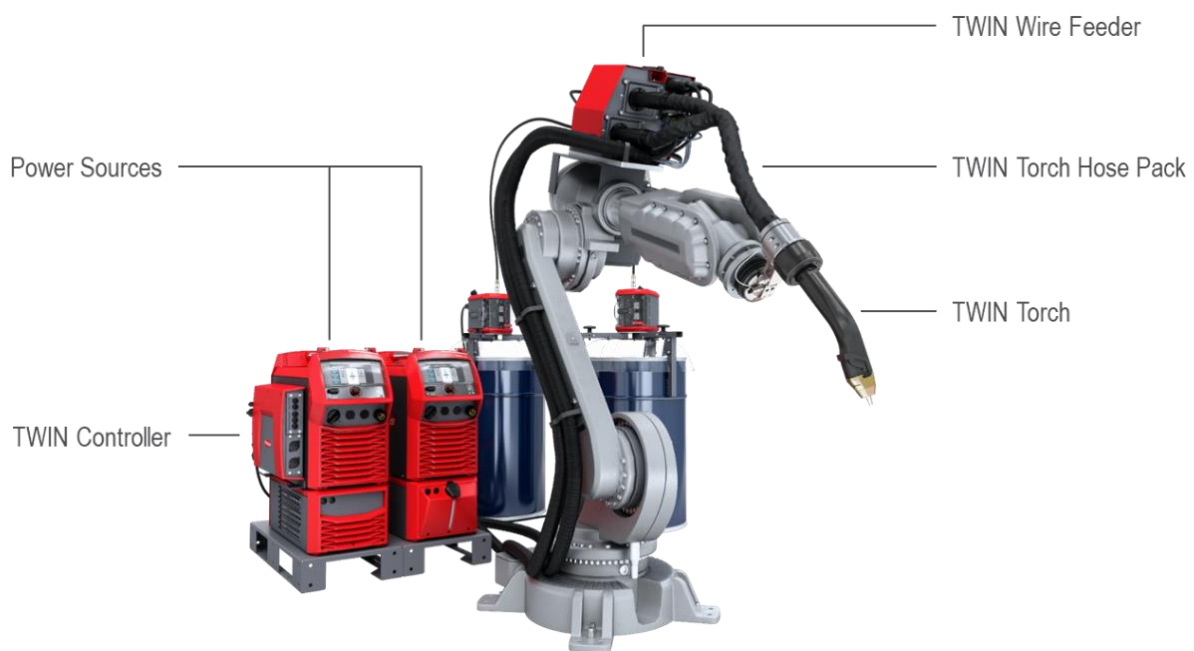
Rendering of the used TPS/i TWIN Push welding system.
